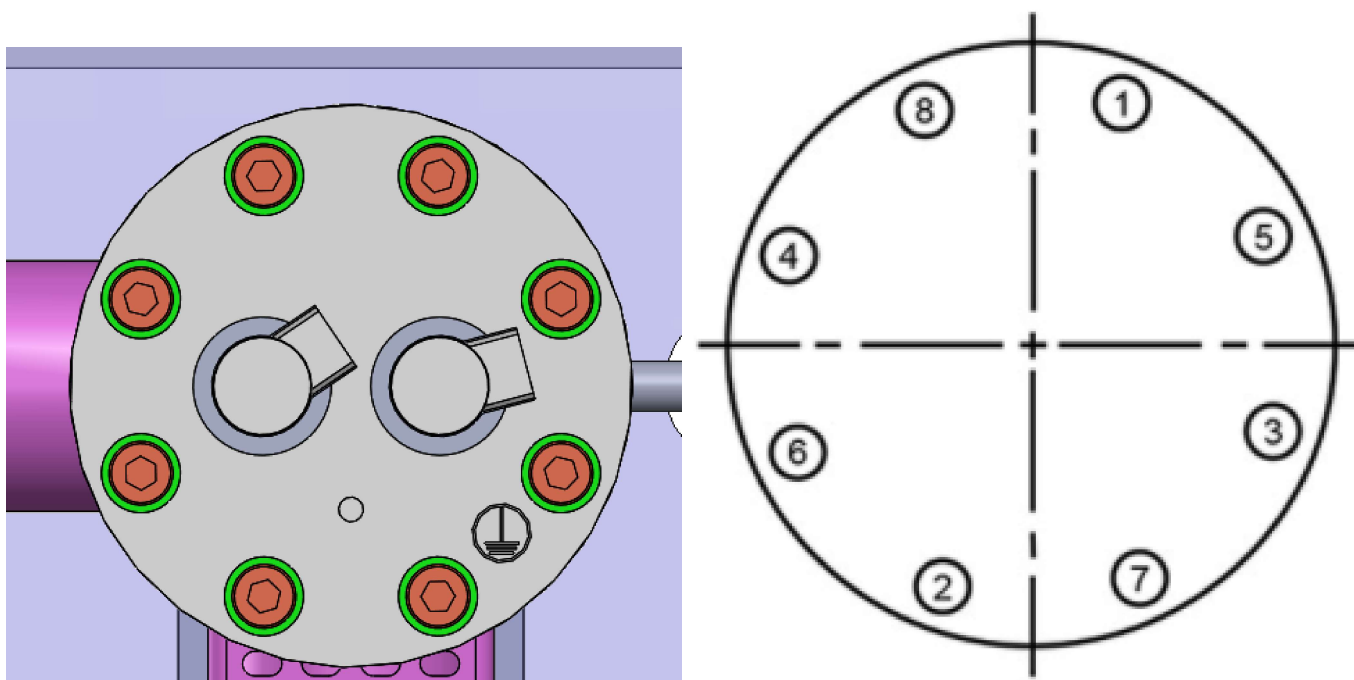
Heater Housing End Cap - M8X1.25X30 SHCS – Qty 8
